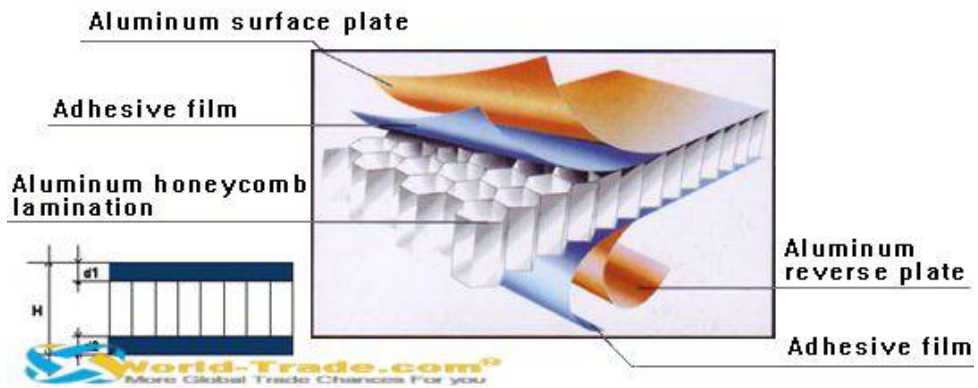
Aluminum HoneyComb Carbon Fiber
